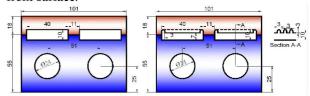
Cross-sectional view of the semi-prototype mockups. The left one has a plain rectangular cooling channel, and the right has a hypervapotron type channel.
